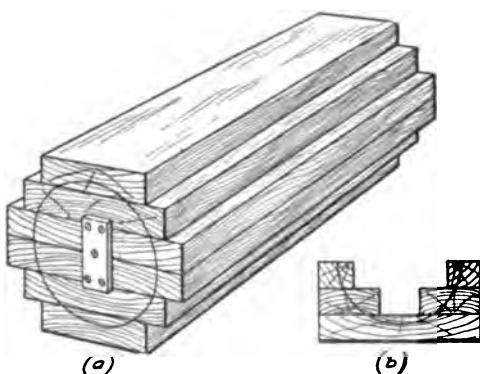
Method of Assembling Wood for Large Pipe Pattern
